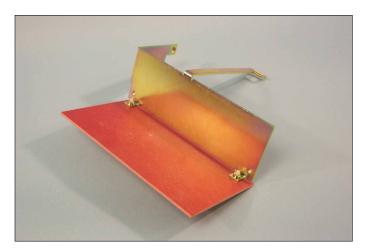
Insulation Barrier Installed on the Trip Unit Mounting Bracket.
